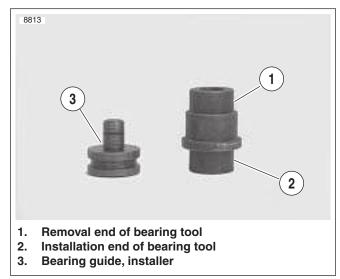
Clutch Shell Bearing Remover/Installer B-45926
